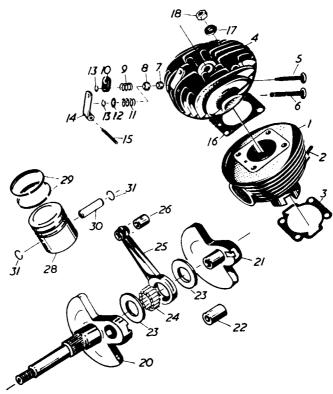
COMPONENT PARTS OF THE QUICKLY ENGINE
